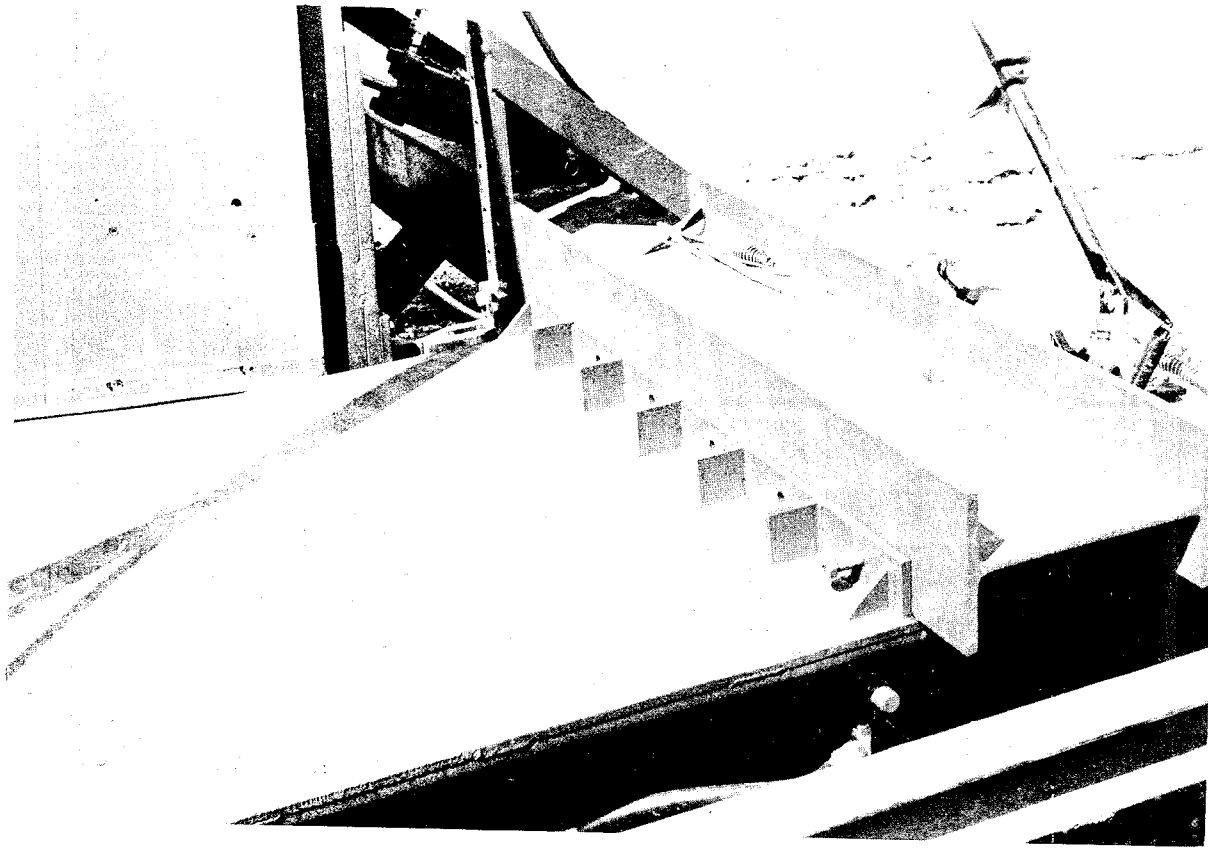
Support platform detail showing the support brace to the cutting head connector.
